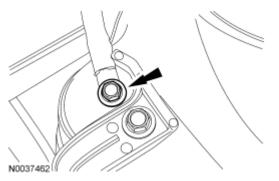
Locating Ground Wire And Bolt Courtesy of FORD MOTOR CO.
